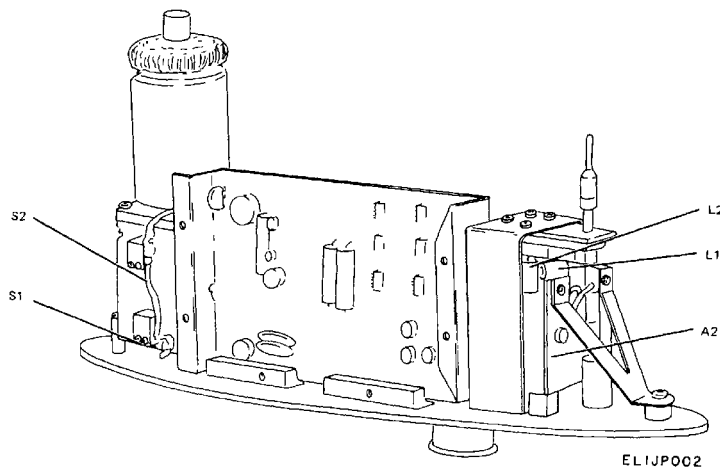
(2) 437S-1/1A/1C coupler assembly test points (sheet 2 of 2).
